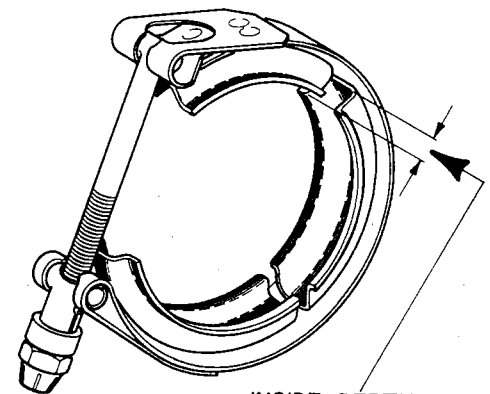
Exhaust Manifold Coupling Inspection Requirement
